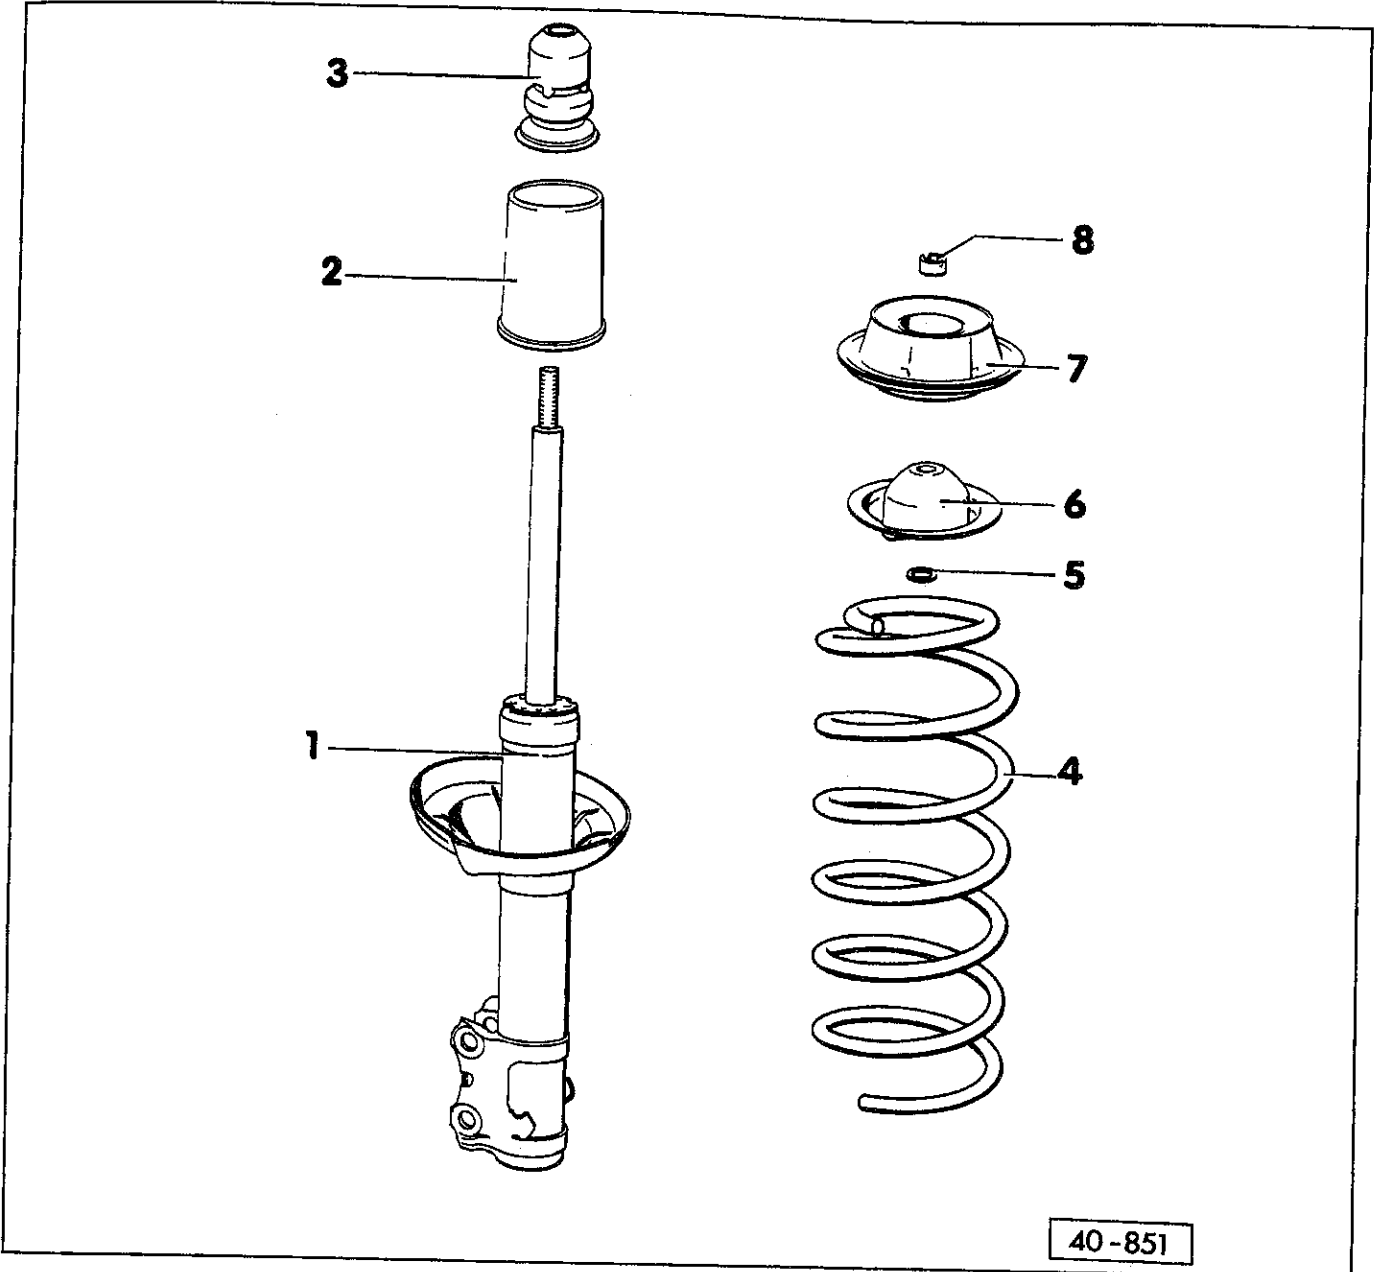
Exploded view of front strut assembly used on cars with base suspension.
